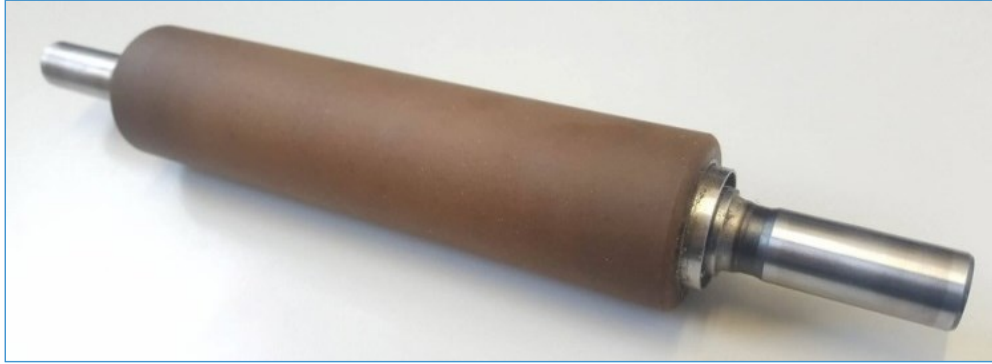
The tested NBR/PUU blend covered Roller. Roller retains integrity without any surface cracks.
